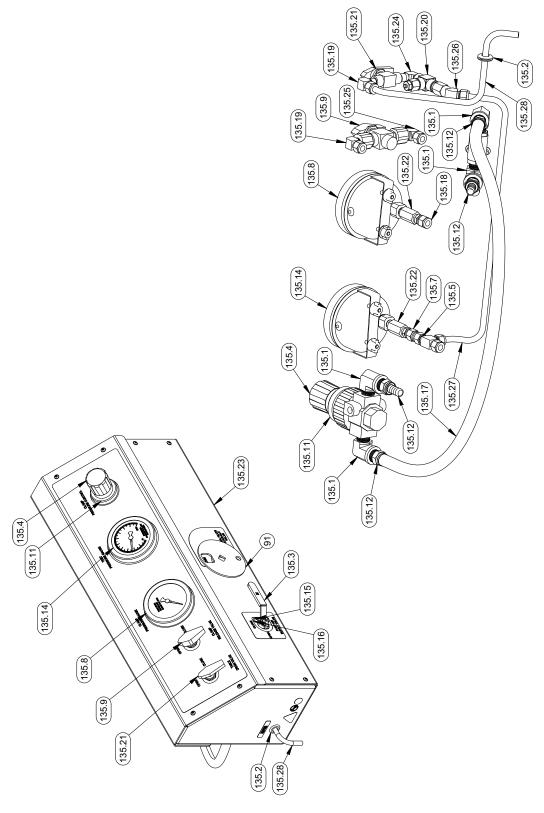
SRV-3K WITH VESSEL CLAMP CONSOLE ASSEMBLY (P/N 88845)
